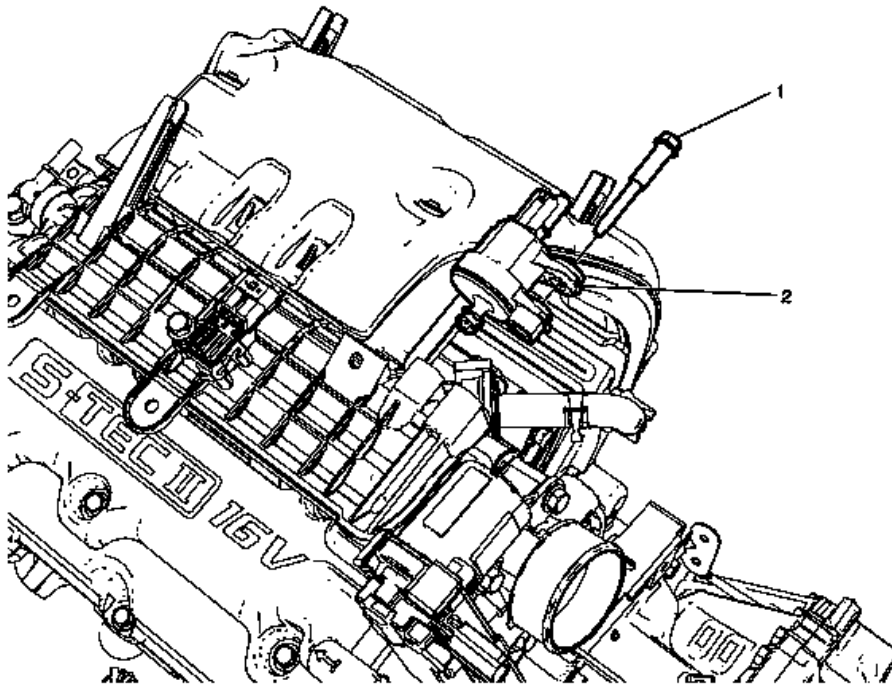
Evaporative Emission Canister Purge Solenoid Valve
